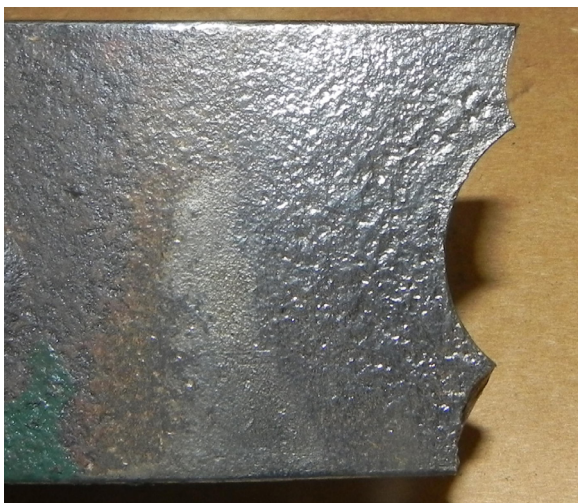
Close up image of a side plate that was overheated during assembly, which resulted in a plate crack.
